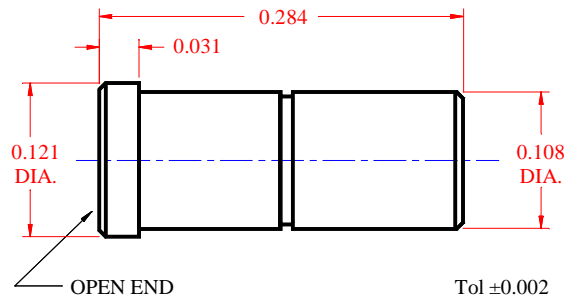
RO Socket # 9871/ 9871LF Mechanical Dimensions
